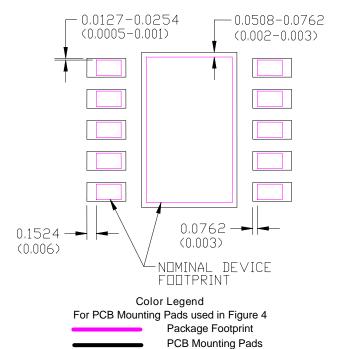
10 Pin DFN Package Footprint Shown with PCB Mounting Pads
